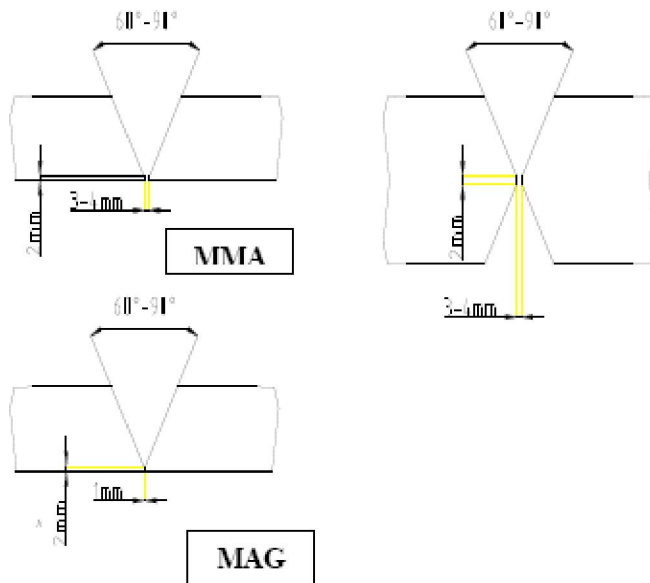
Dimensions of butt joints used for MMA and MAG welding.
